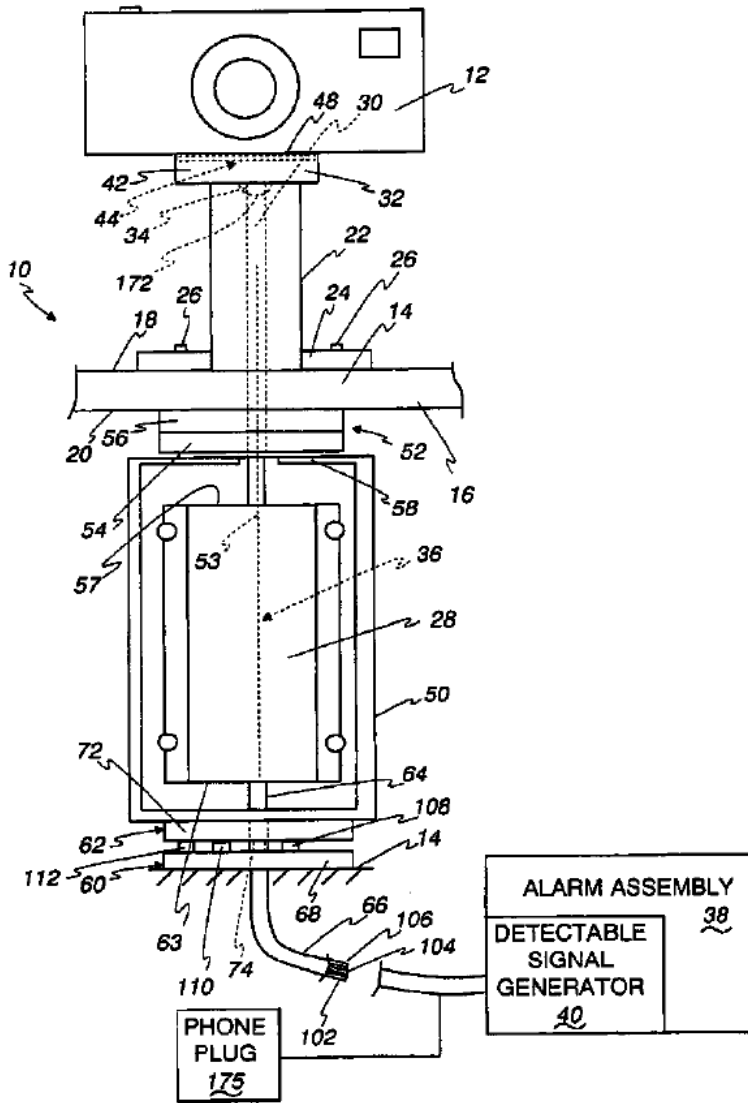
of Frederiksen illustrates a swivel assembly in the form of cooperating first and second connector assemblies 60, 62 that maintain a commutative electrical connection between the ends of first and second discrete parts 64, 66 of the cord 30 (7:5-7), wherein the second discrete part 66 is electrically coupled to an alarm assembly 38 providing an upstream
